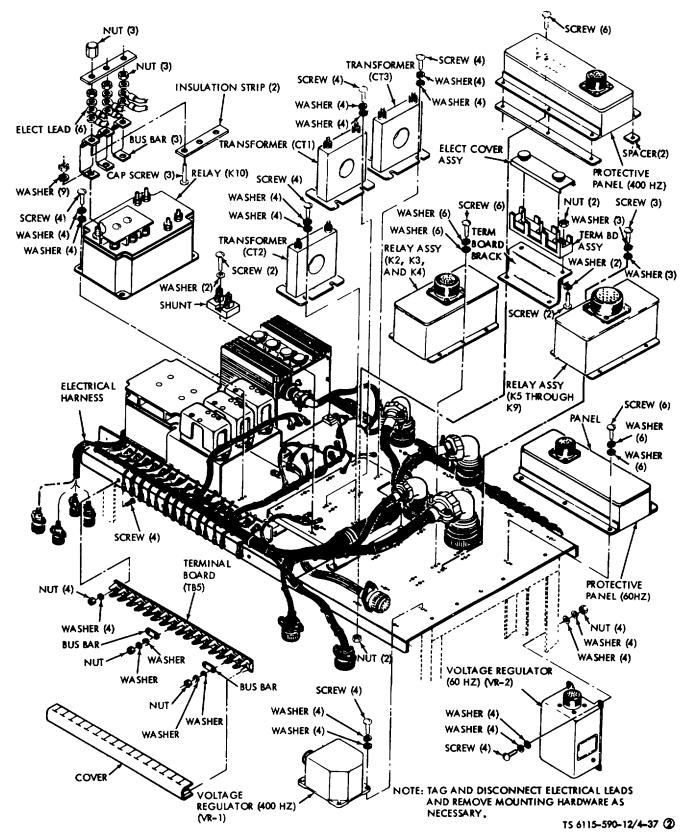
(2). Upper Electrical Power Chassis Component Replacement (Sheet 2 of 2) (TS 6115-590-12/4-37<sup>2</sup>). 4-85
